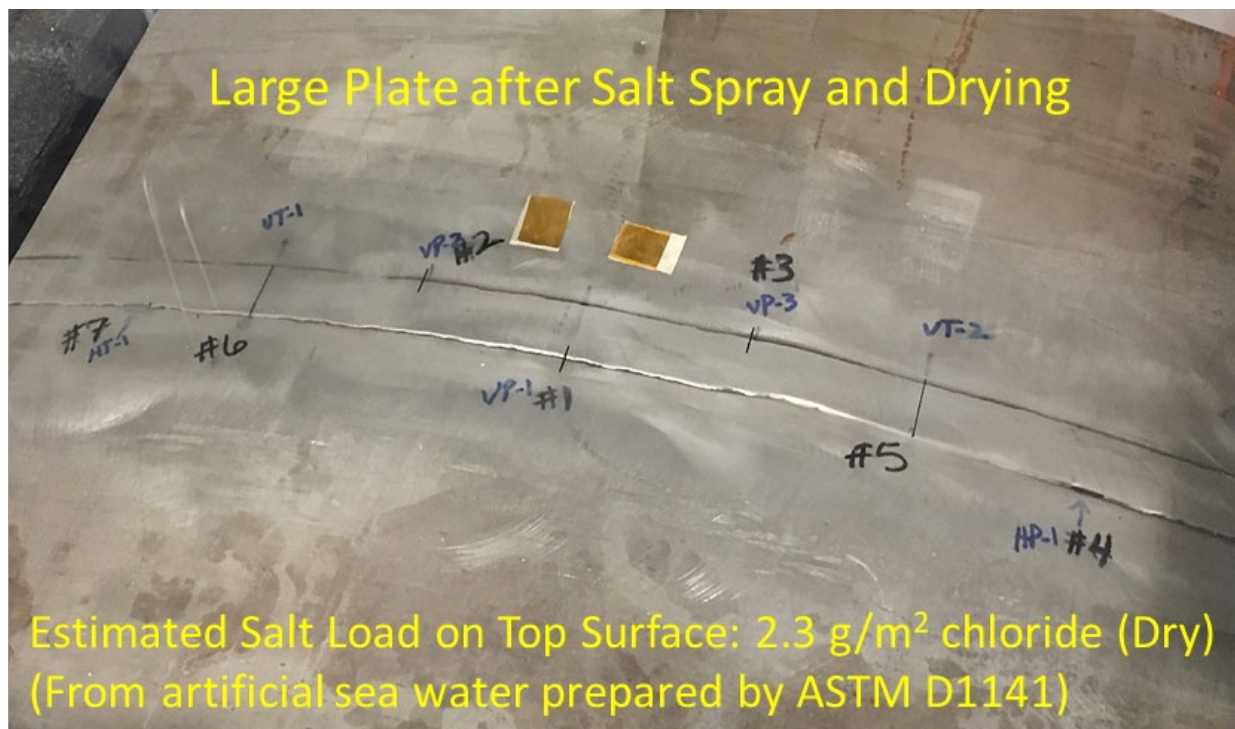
Large plate with EDM starter cracks after salt spray and drying
